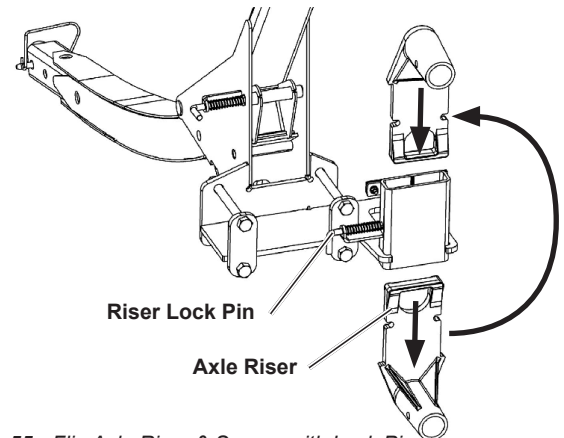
Flip Axle Riser & Secure with Lock Pin
